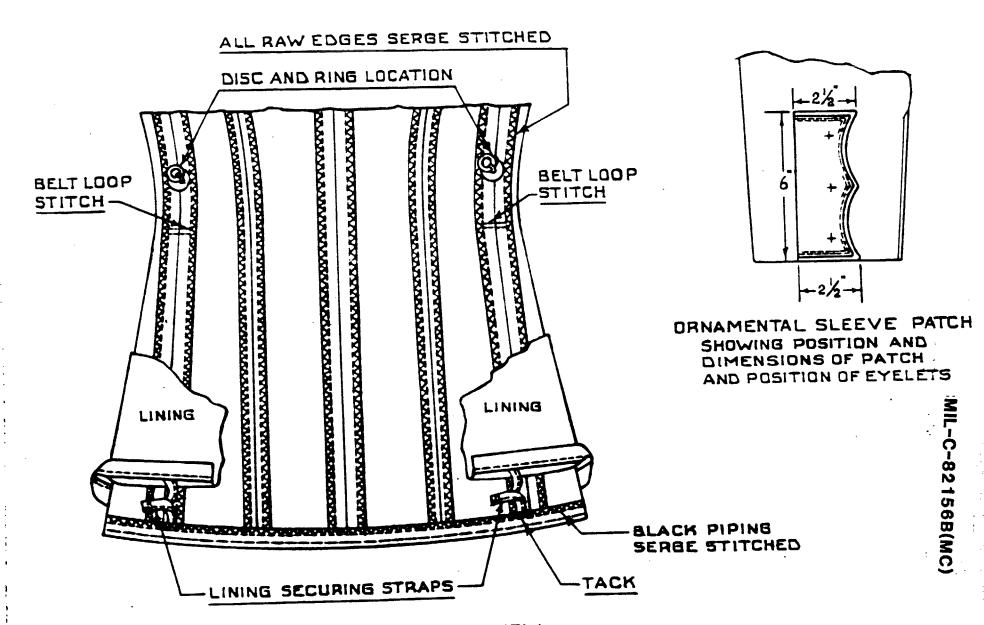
COAT, MANS: SCARLET, DRUM AND BUGLE CORPS; MUSICIANS
